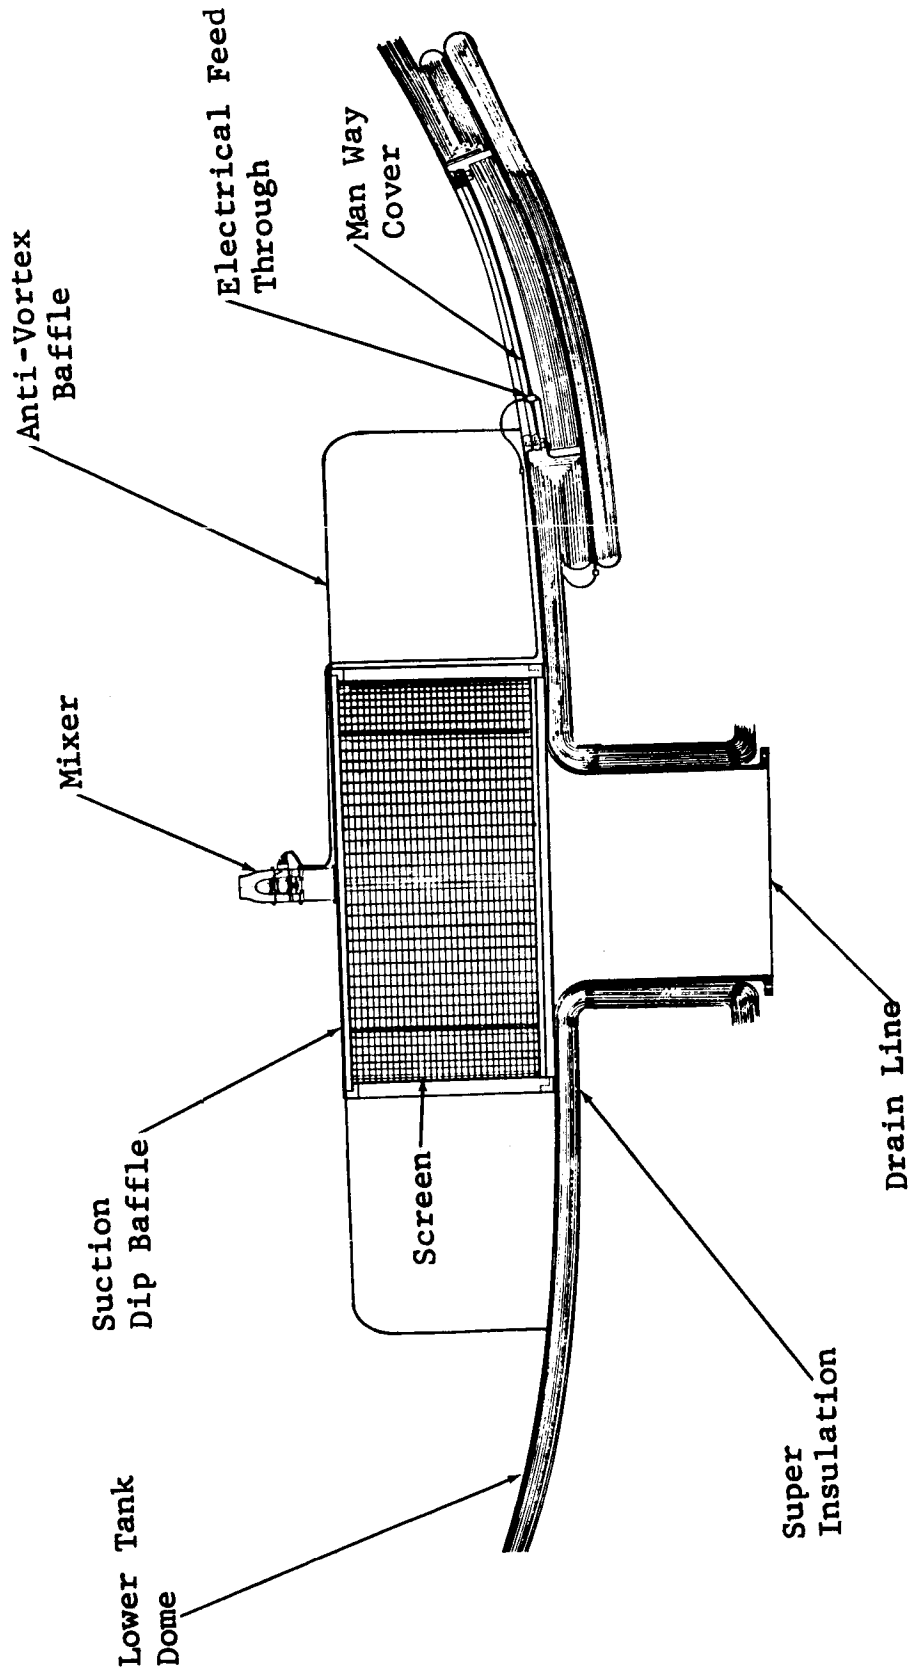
Mixer Installation on Aft Bulkhead of Tank
